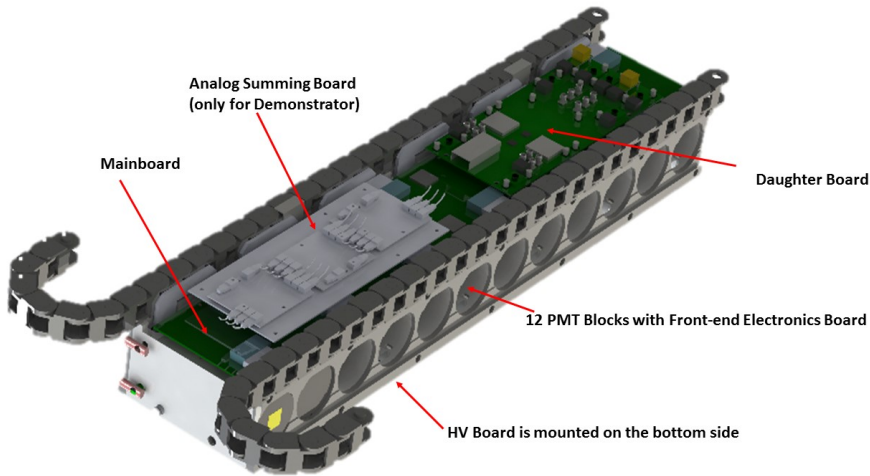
Detailed drawing of the minidrawer indicating the position of the different parts of the front-end electronics.
